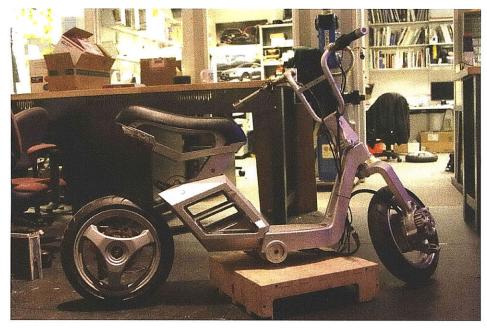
, RoboScooter G2 final assembly was done in the MIT Media Lab
